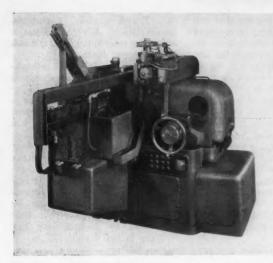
Centerless No. 12 spider grinding machine to be exhibited by Landis Tool Co.
